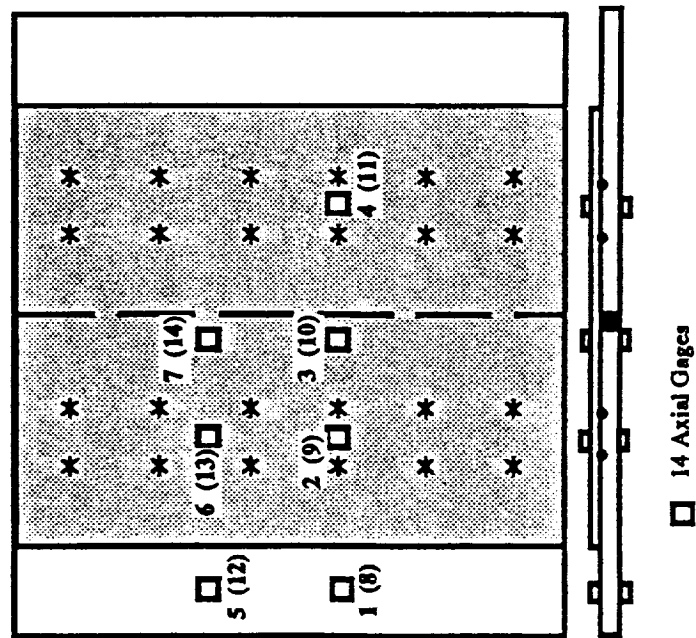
Standard Tension Specimen for Fusion Weld Reinforcement.
